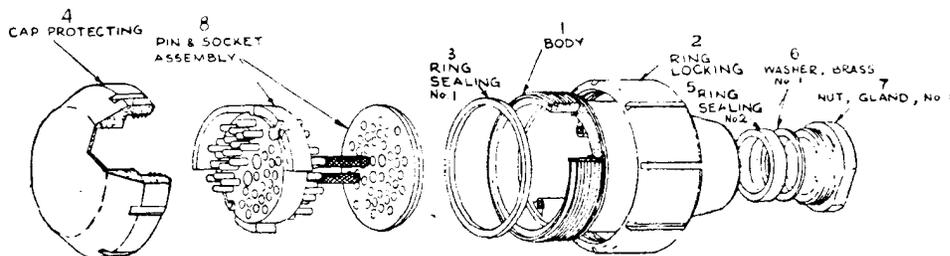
EXPLODED VIEW OF A CABLE CONNECTOR PRODUCED ON THE PARALLEL PERSPECTOR.
